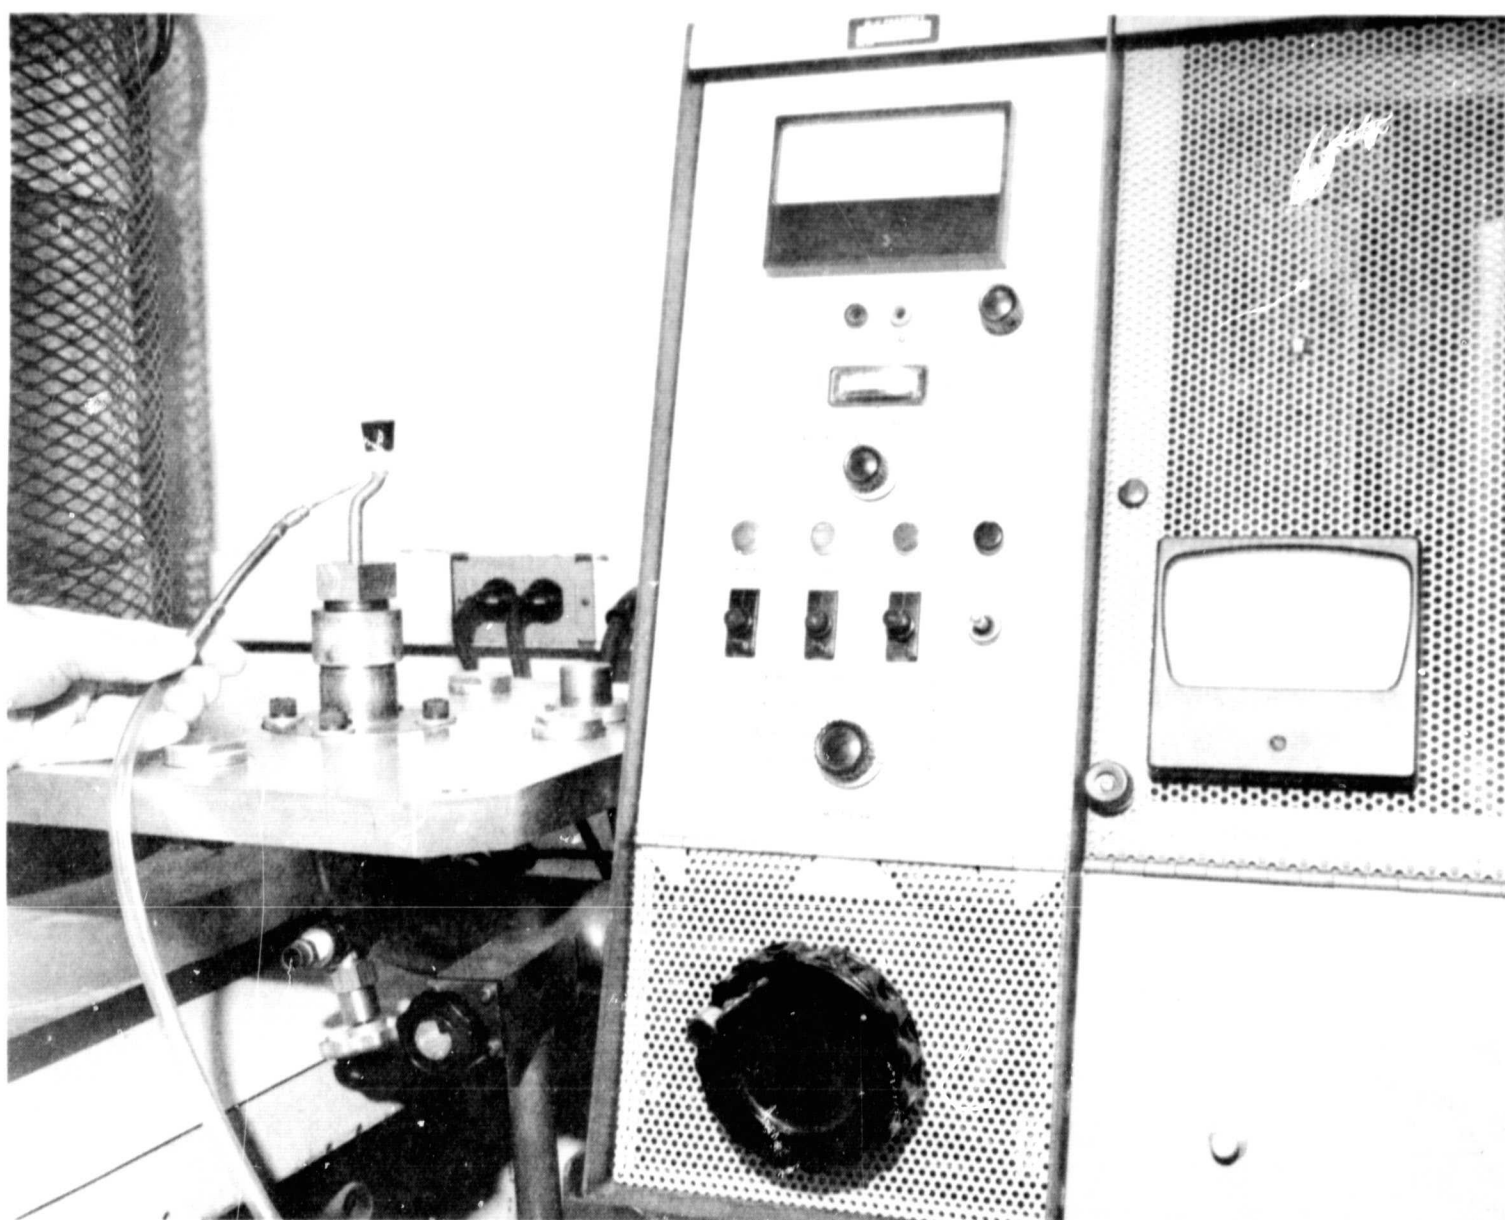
Leak Checking of a Copper Pipe-to-Sample
